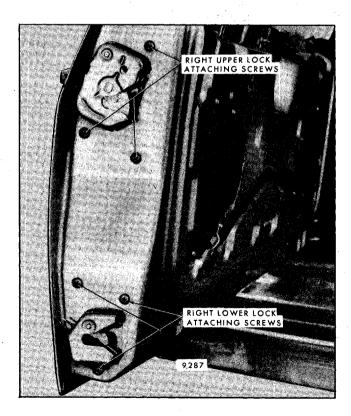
Tailgate Right Upper and Lower Lock Attaching Screws
